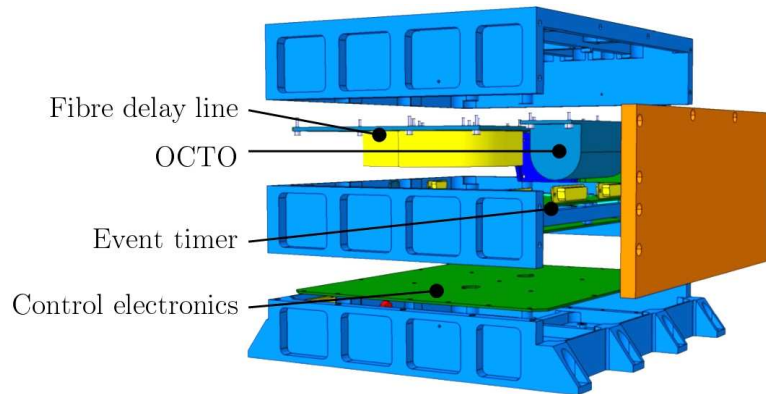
Exploded view of the T2L2J2 electronics subsystem SSE. CAD-view © EREMS, France
